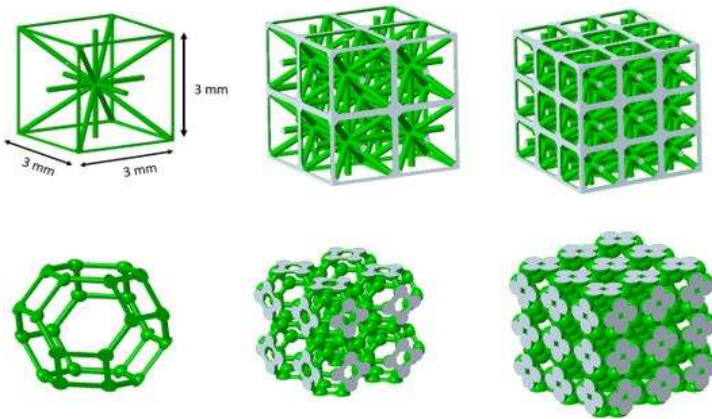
Showing Lattice to scaffold formation for Iso truss and Kelvin truss
